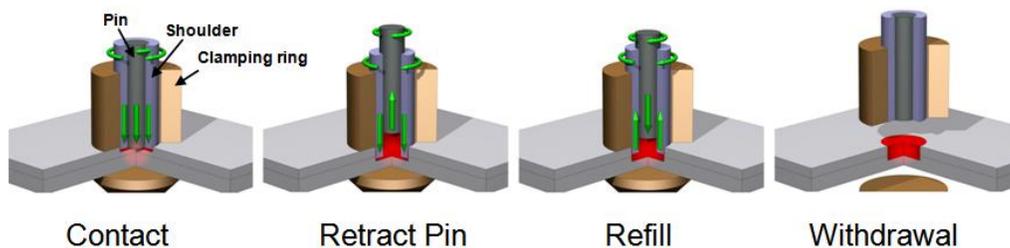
Schematic diagram of the friction stir spot welding operation
